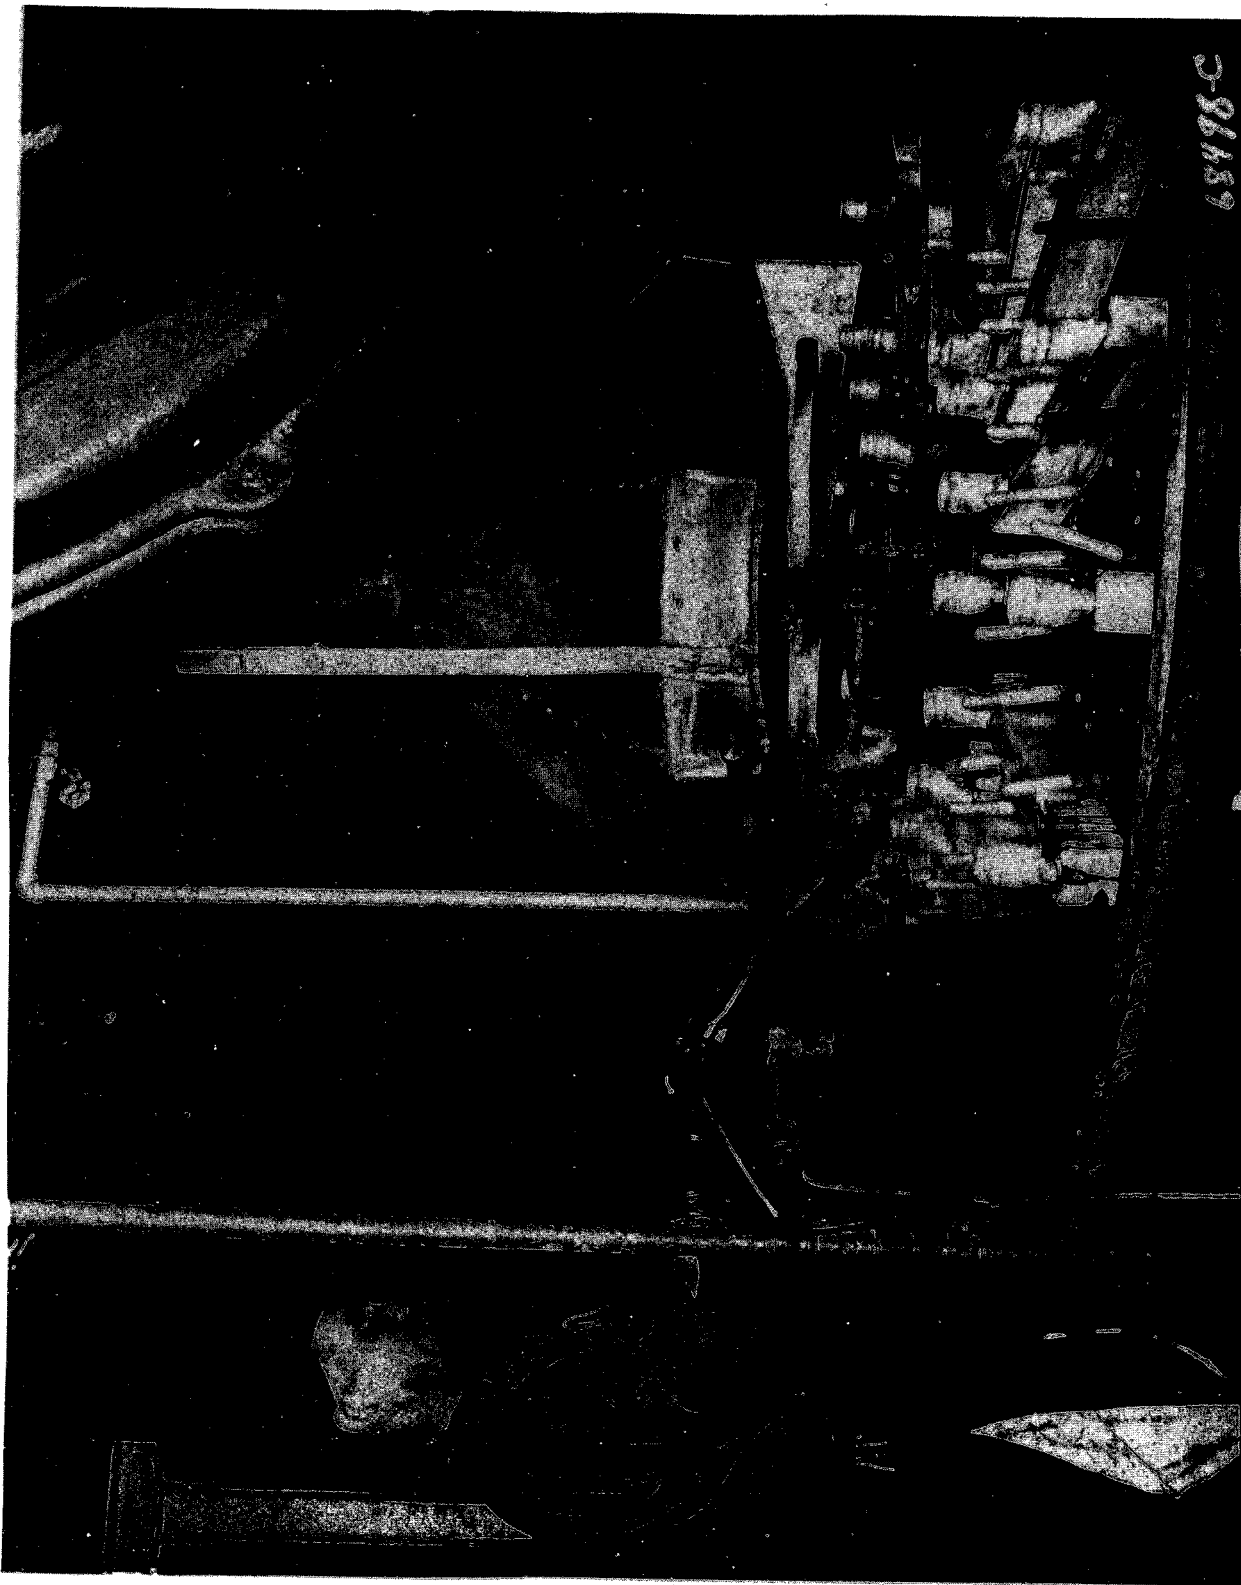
Furnace soldering. Radiator part is heated in the furnace, and solder applied by hand after the part leaves the furnace.
